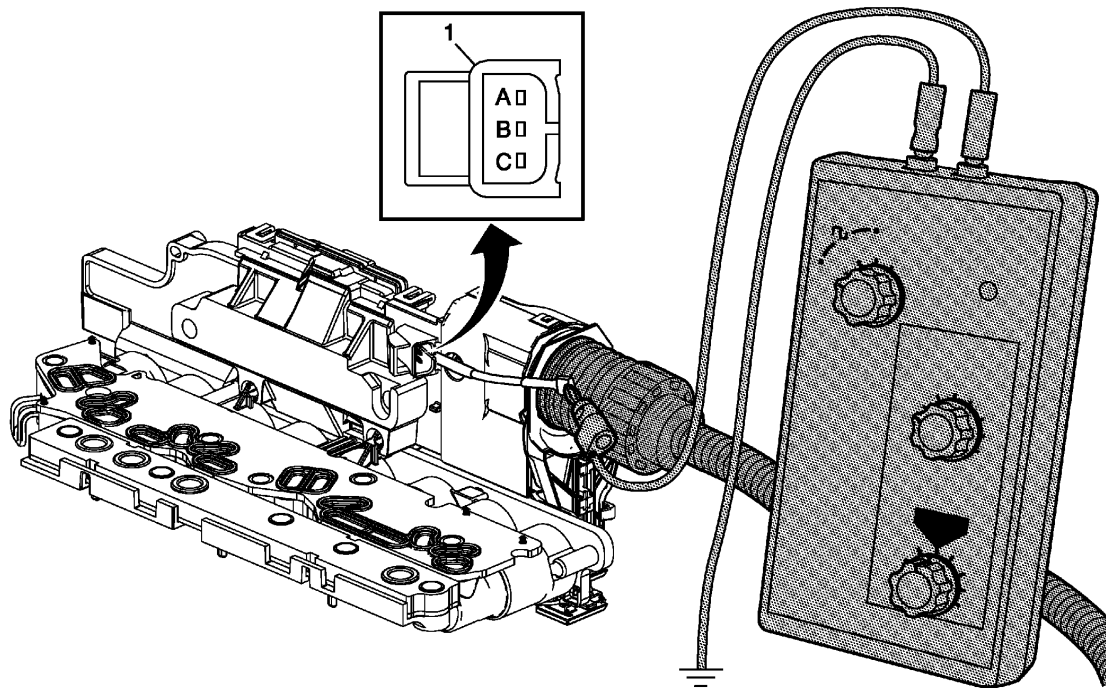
Control Solenoid (W/Body & TCM) Valve Assembly
